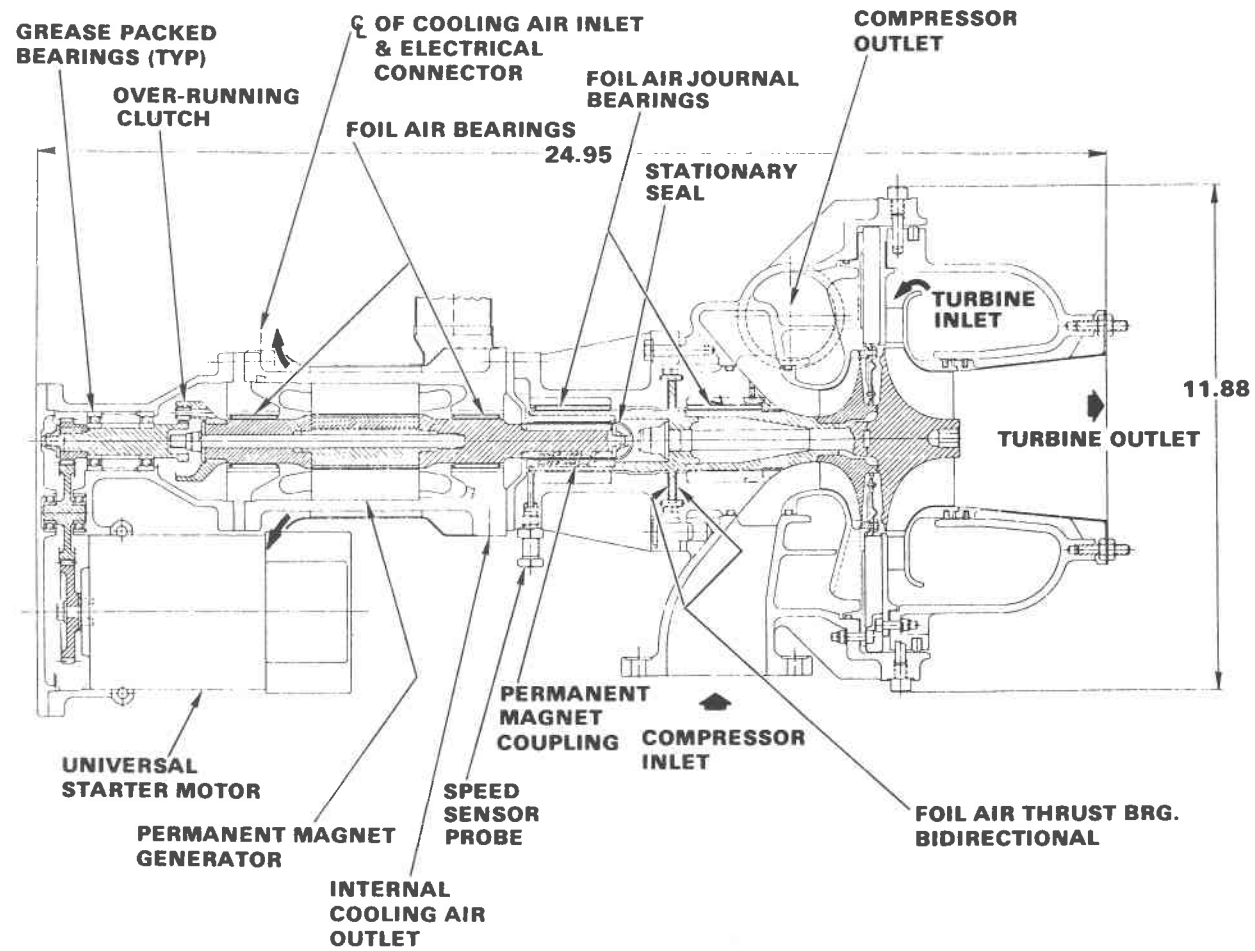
Drawing of Subatmospheric Brayton Power Conversion Assembly
